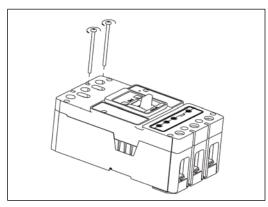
Remove Cover Fastening Screws from Circuit Breaker
